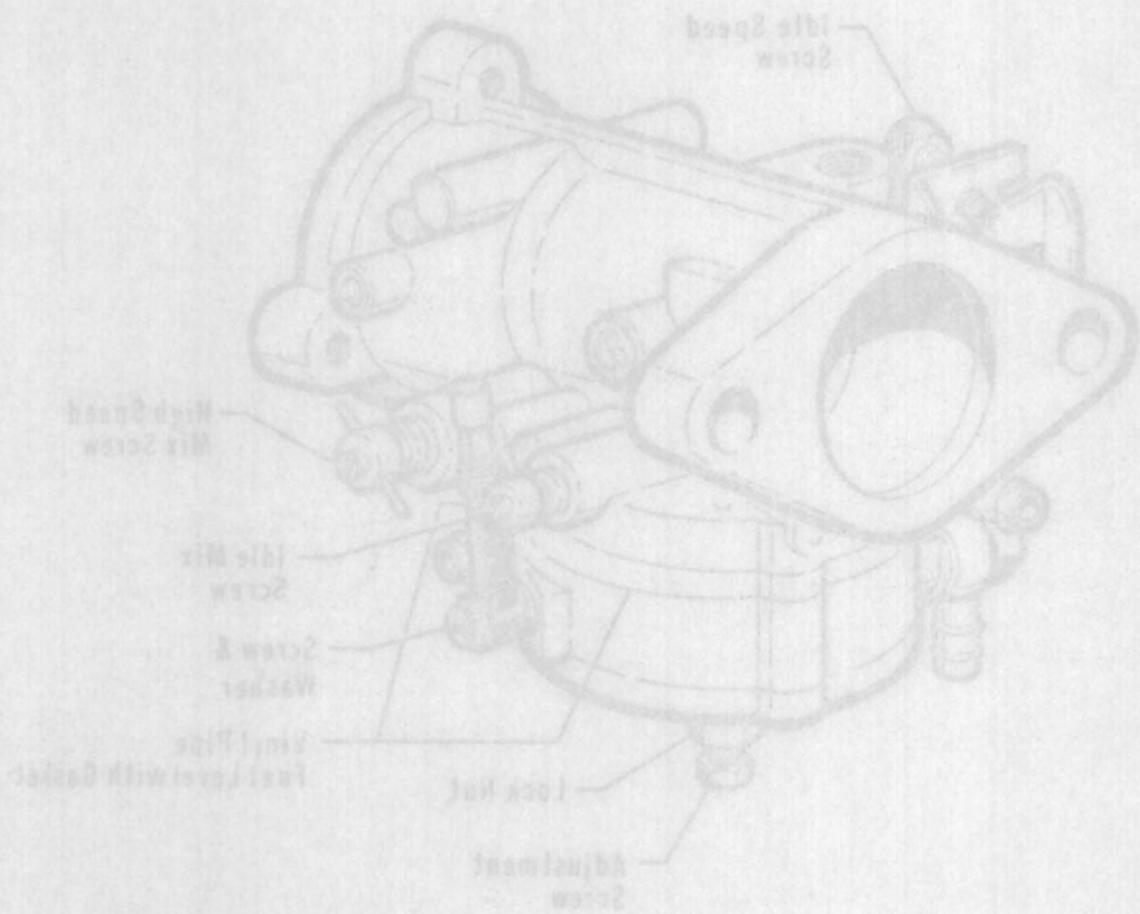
FUEL LEVEL OF CARBURATOR
